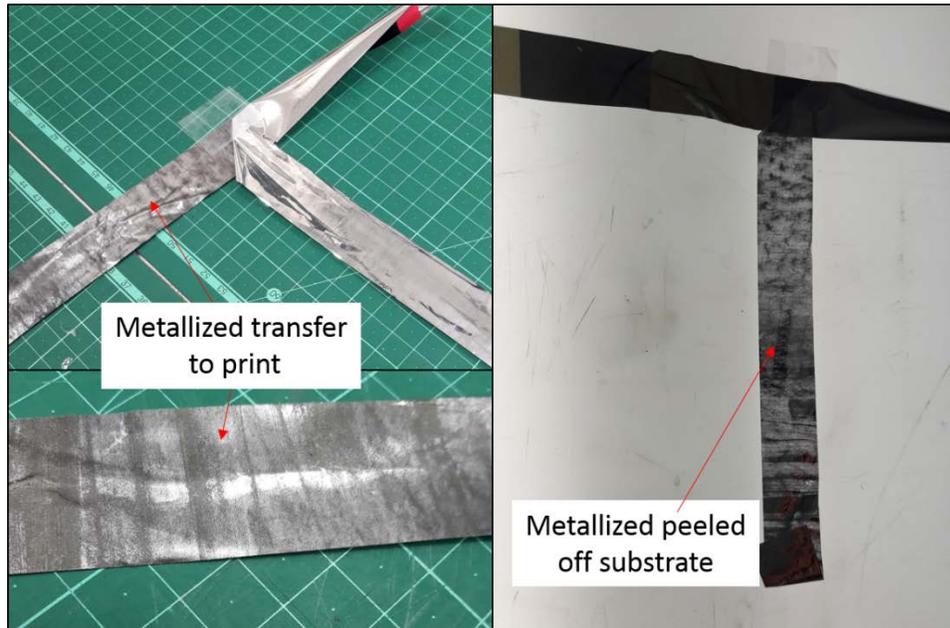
Visual inspection of delamination (left) and using back-light (right) showing the metallized layer failure
